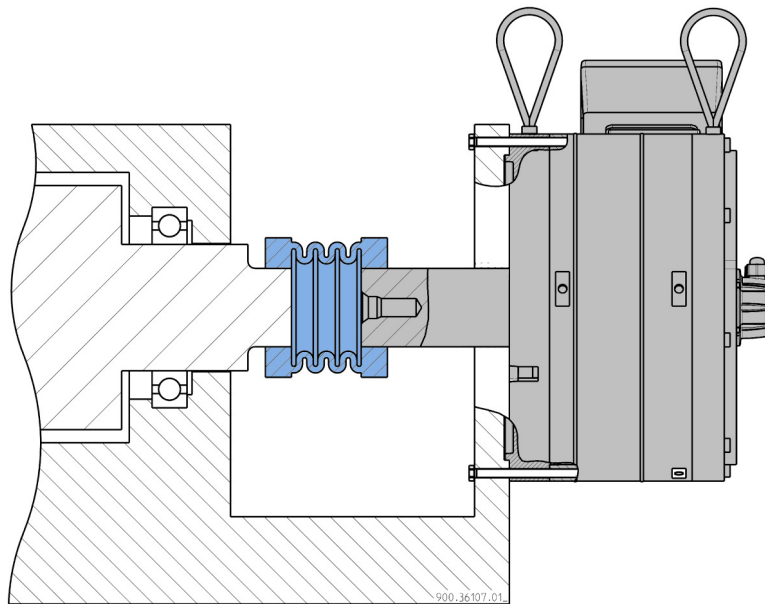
Decoupling the machine shaft from the motor shaft using a coupling
